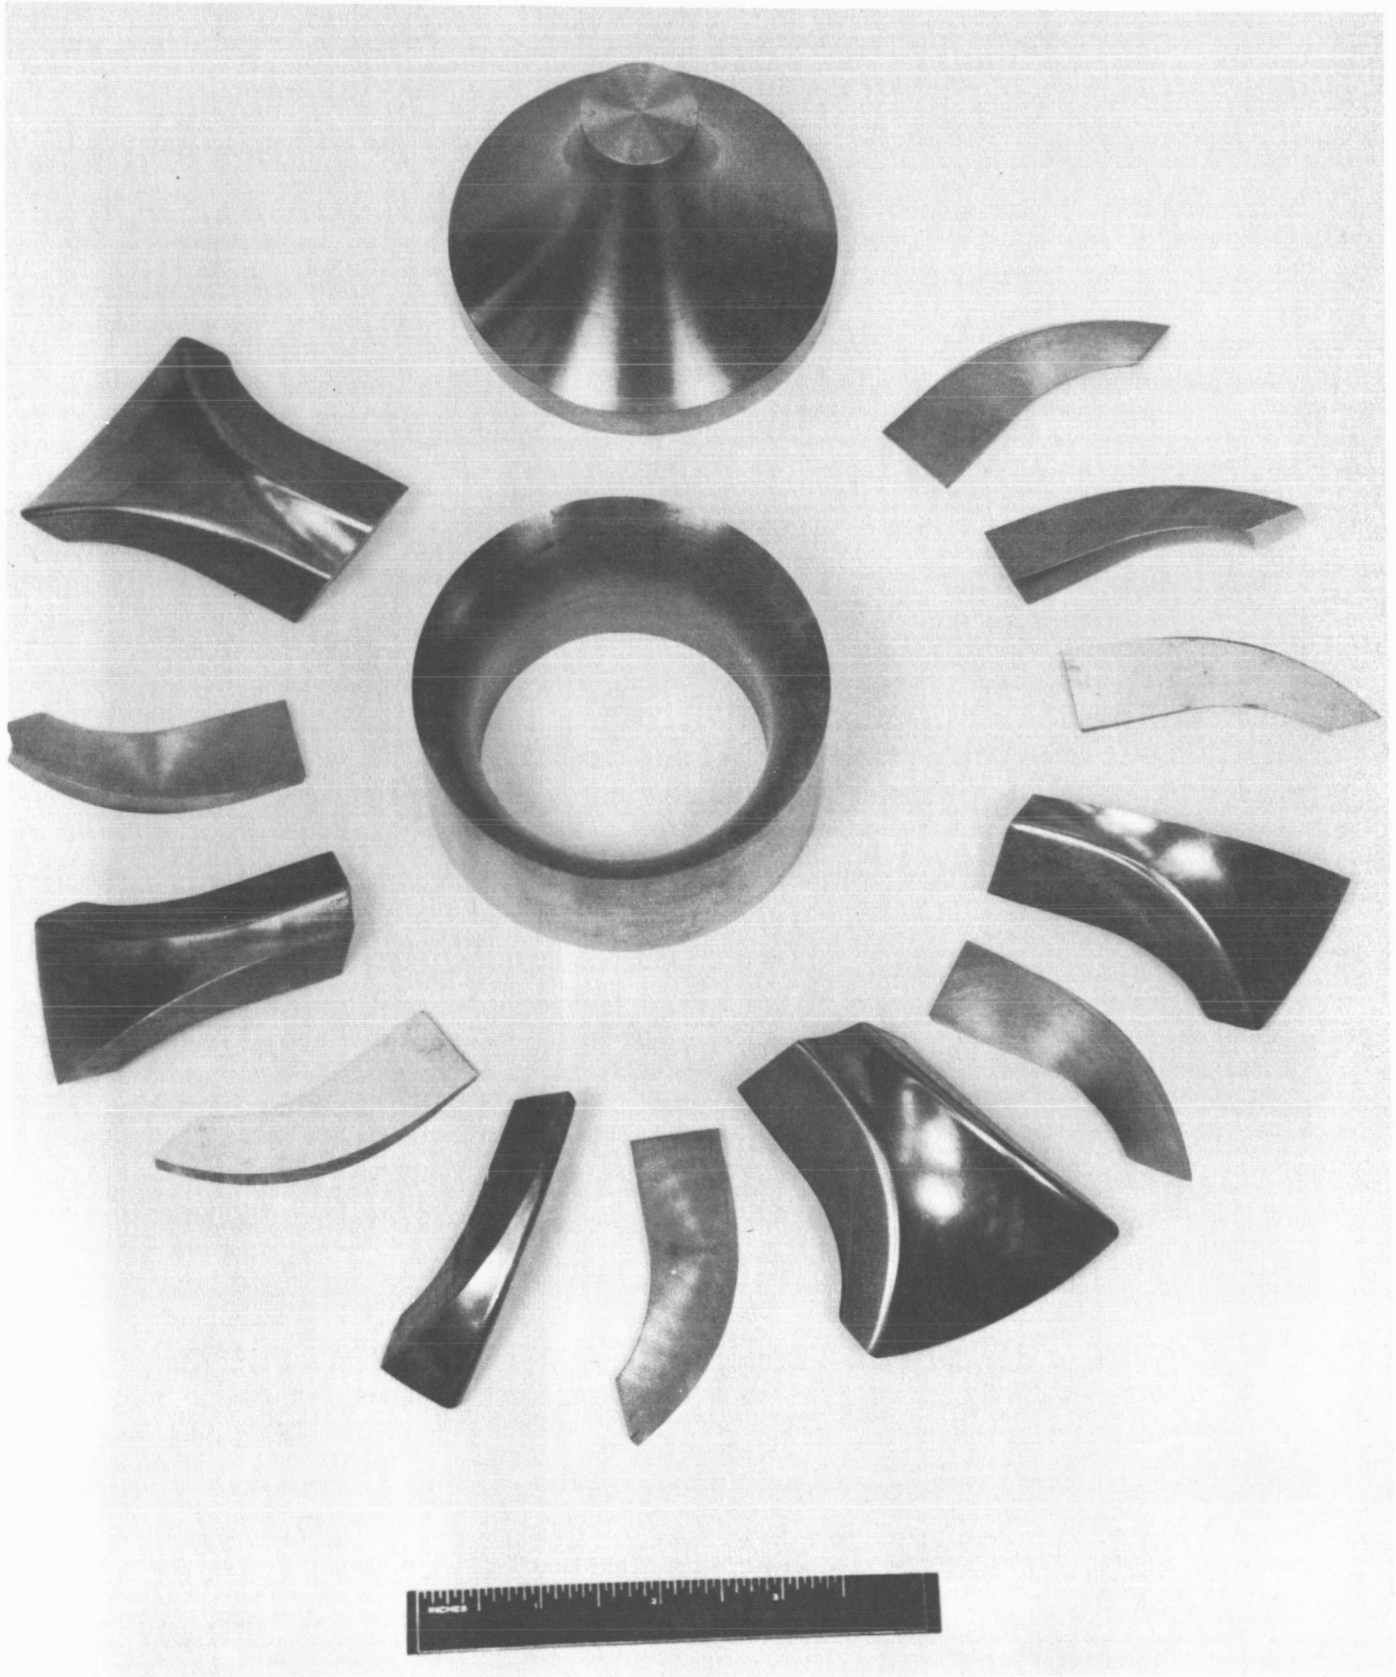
Disassembled View of Second Trial Sample Showing Modified Core
